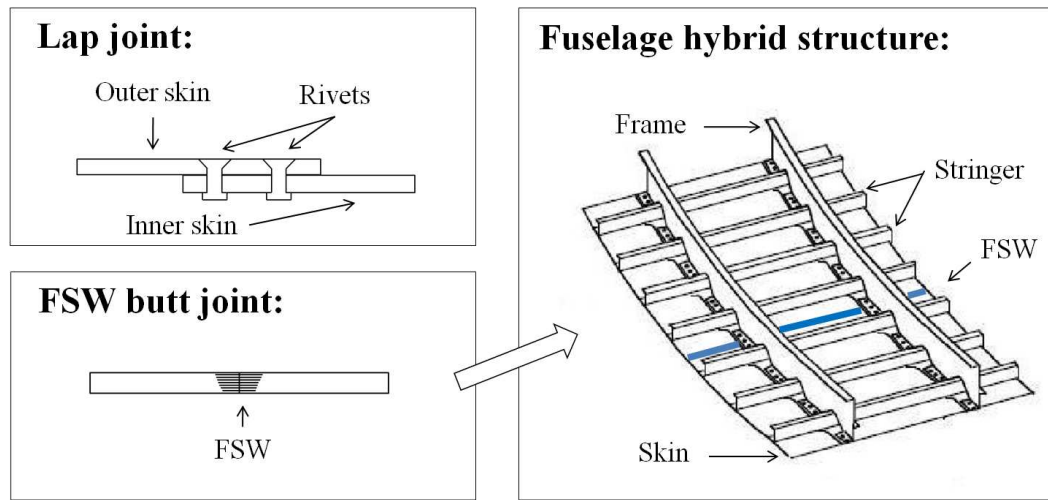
Application of friction stir welding in the fuselage structure.
